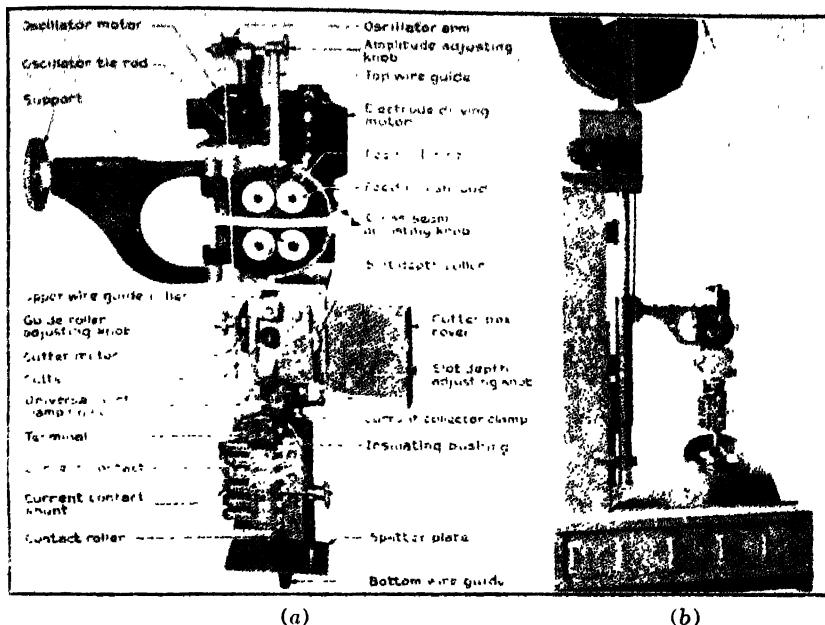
(a) Automatic arc-welding head for use with heavily coated electrode. (b) Application of automatic arc-welding head on a circular seam welder for arc-welding 16-in.-diam tank wheels (shown in position for making hub weld).
